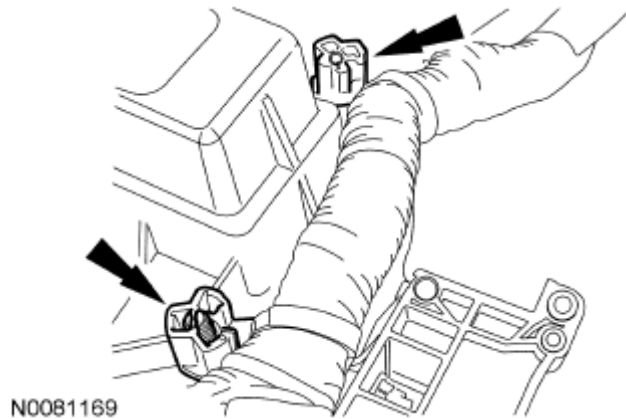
Locating Wiring Harness Retainers And LH Side Valve Cover Stud Bolts
